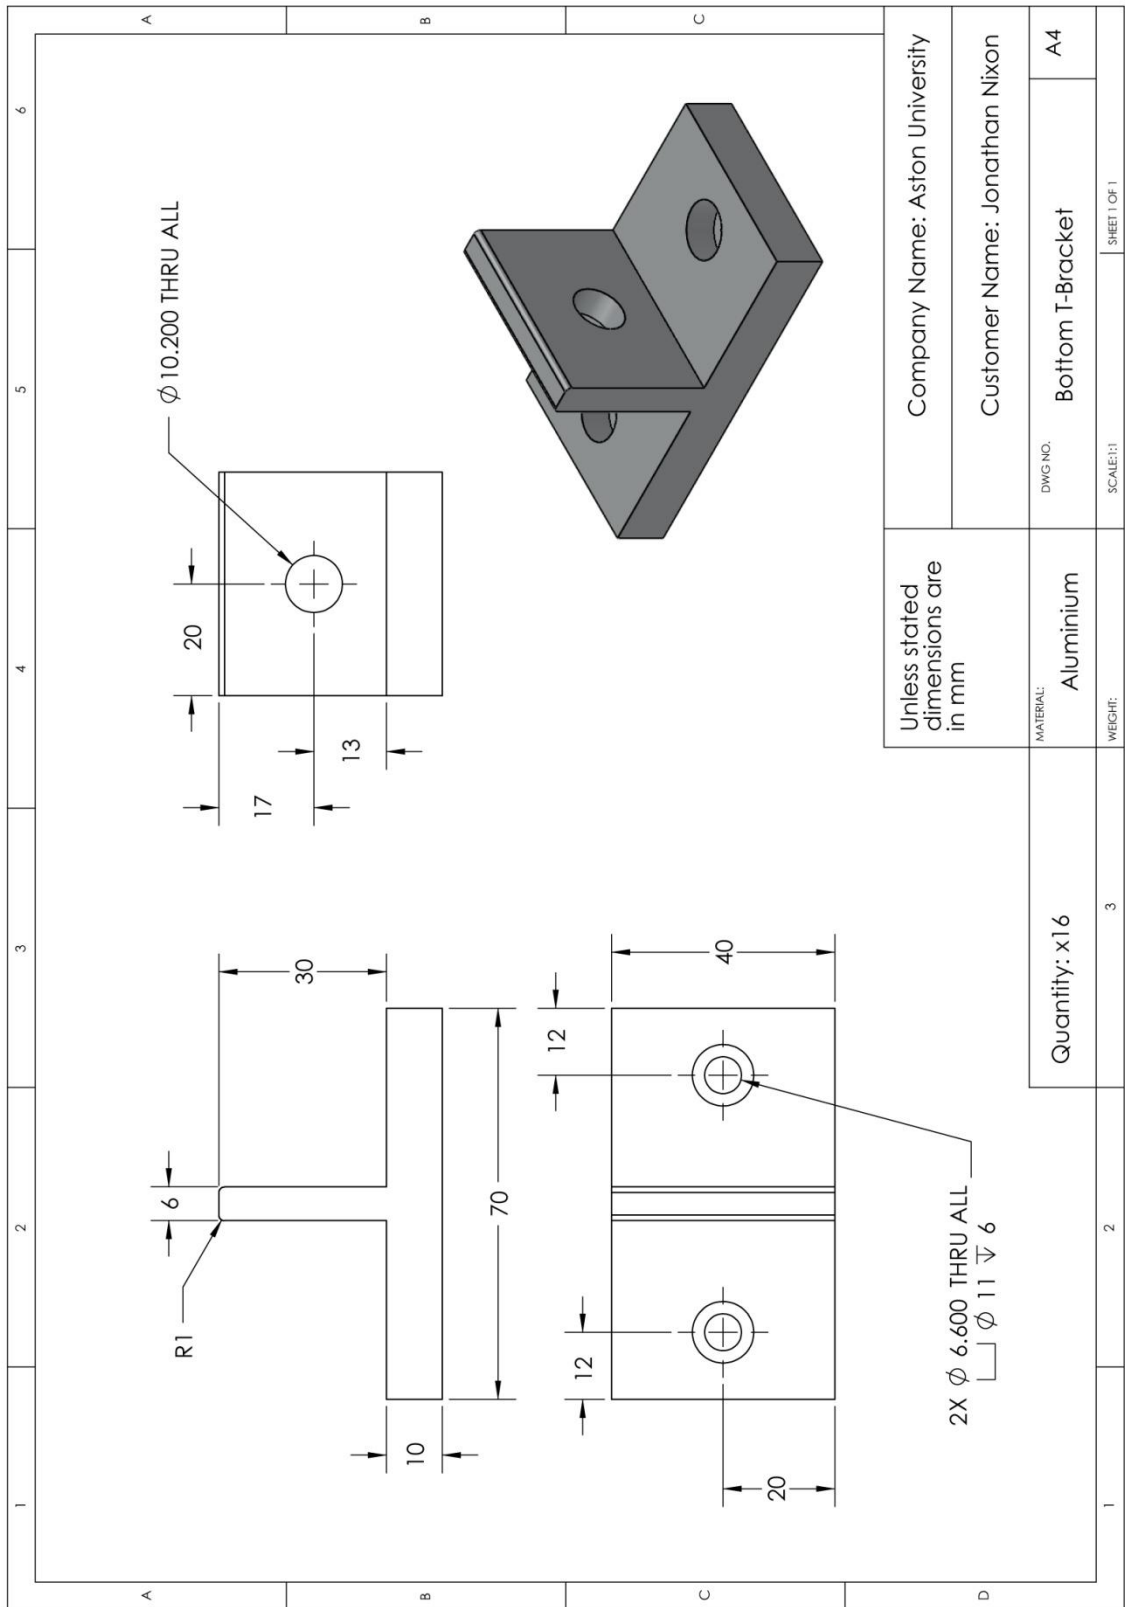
Engineering drawing for the bottom T-bracket.
